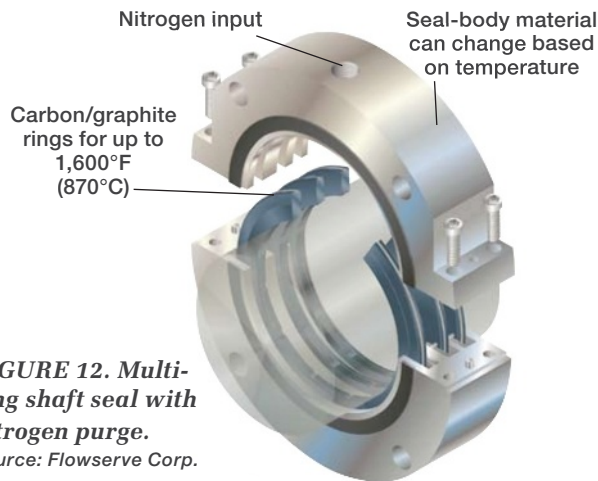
Multi-ring shaft seal with nitrogen purge.
